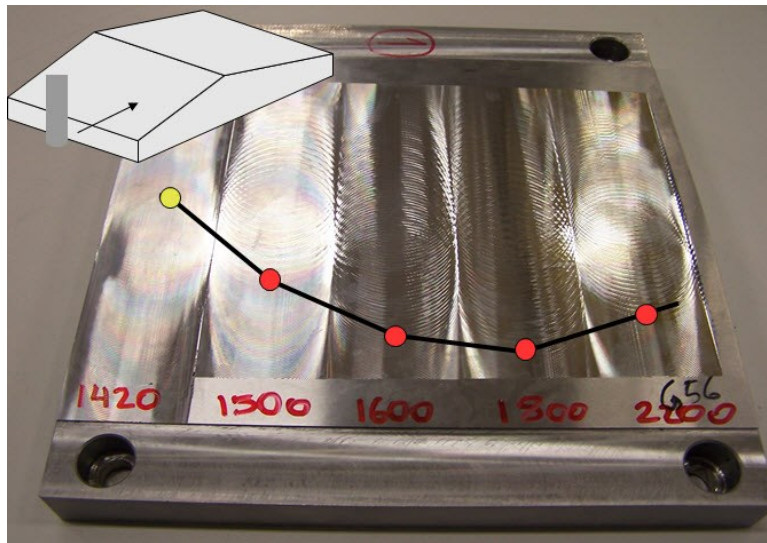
Workpiece surface roughness after slope chatter tests with the lobular shape printed on it.
